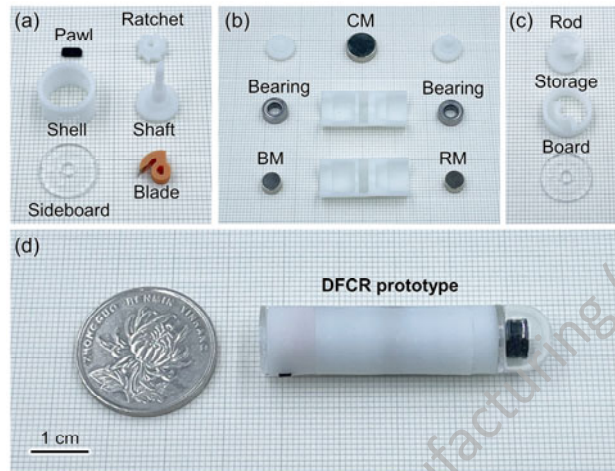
Photographs of the components of the DFCD and final product: (a) tissue biopsy module, (b) MTS module, (c) drug delivery module, and (d) assembled DFCD prototype.
